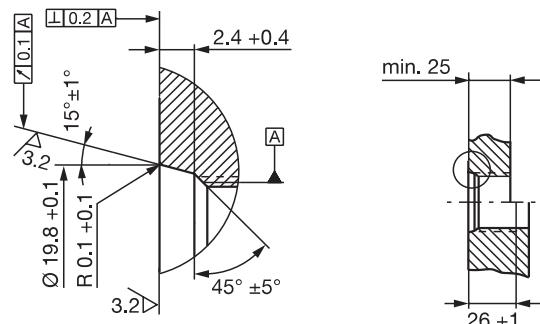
Mounting hole M18x1.5 per ISO 6149 O-ring 15.4x2.1
